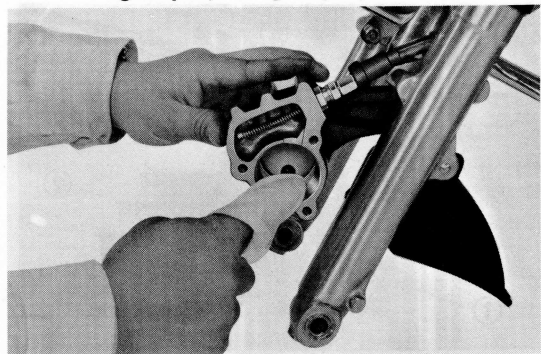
① Cable end ② Adjusting bolt ③ Brake cable bolt
